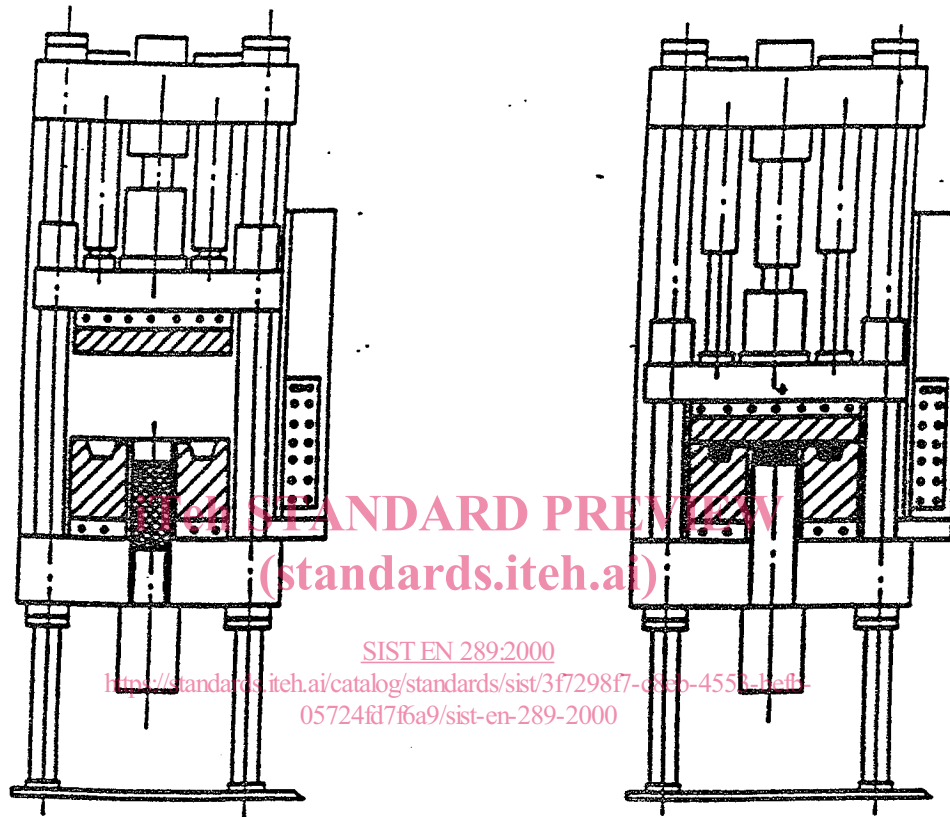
Press for transfer moulding shown with separate power cylinder and with moulding material in transfer cavity.
